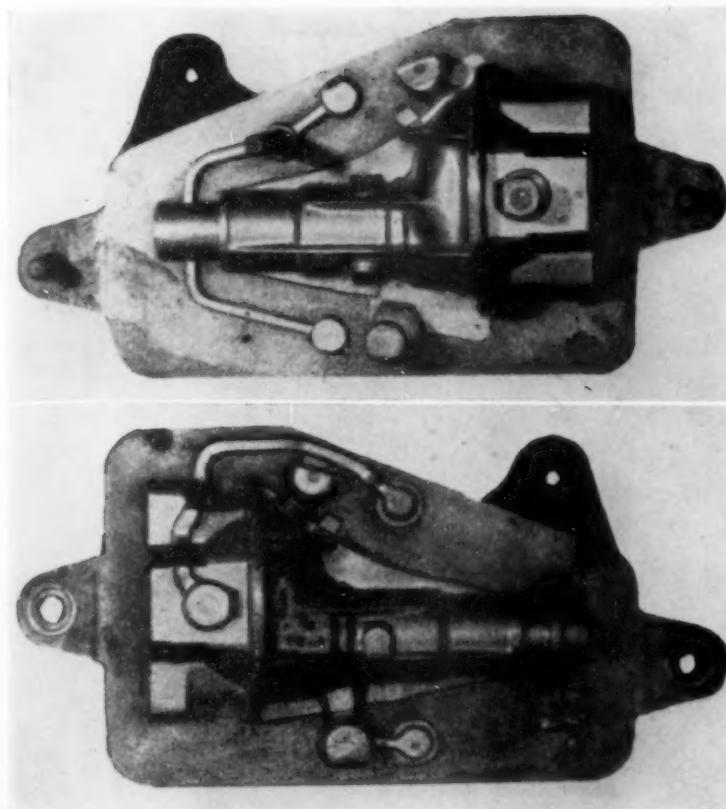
DIFFERENTIAL CARRIER HOUSING AS FORMERLY MOLDED.
